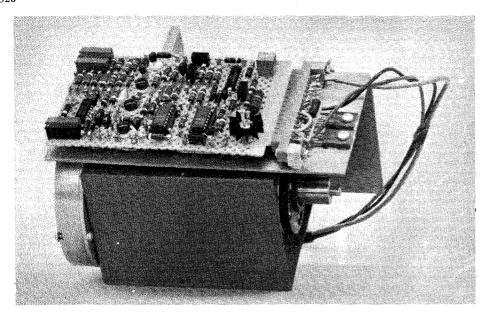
Complete assembly of motor, tacho and electronic unit.
